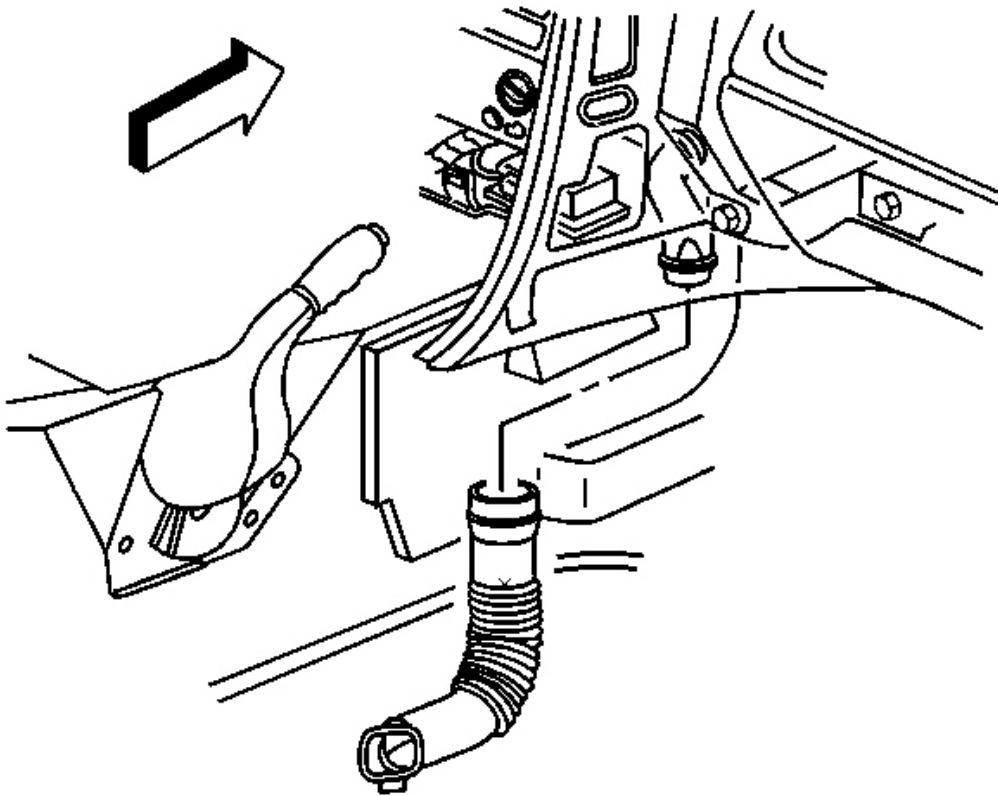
RH Side Driveline Tunnel & Carpet Air Outlet Duct
